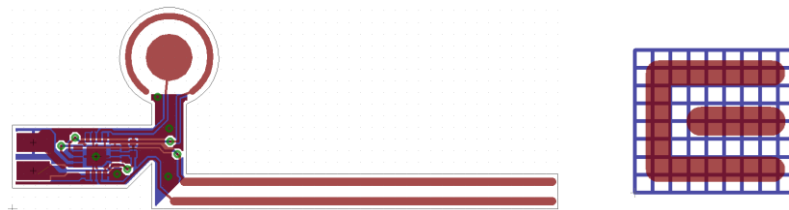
Example sensor layouts captured in PCB design program (Eagle)
